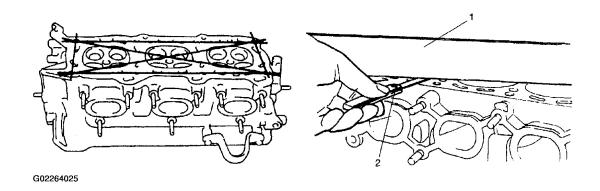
Checking Cylinder Head Gasketed Surface Courtesy of SUZUKI OF AMERICA CORP.
